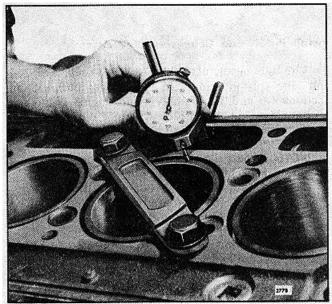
Checking Distance of Liner Flange Below Top Face of Block with Tool J 22273-01
